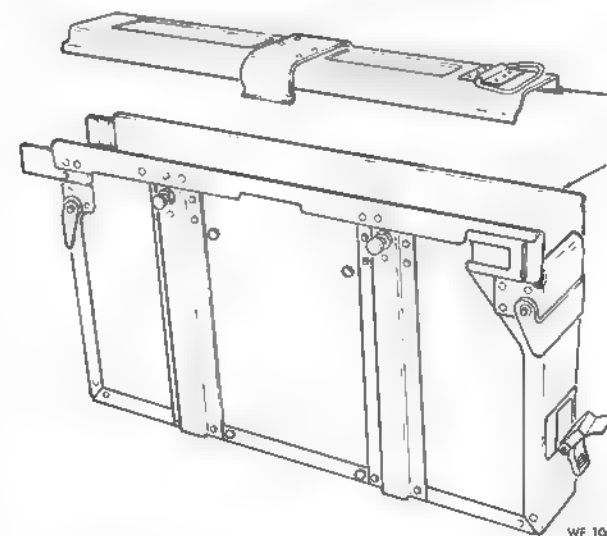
Ammunition box and cover assembly—partially exploded view.
